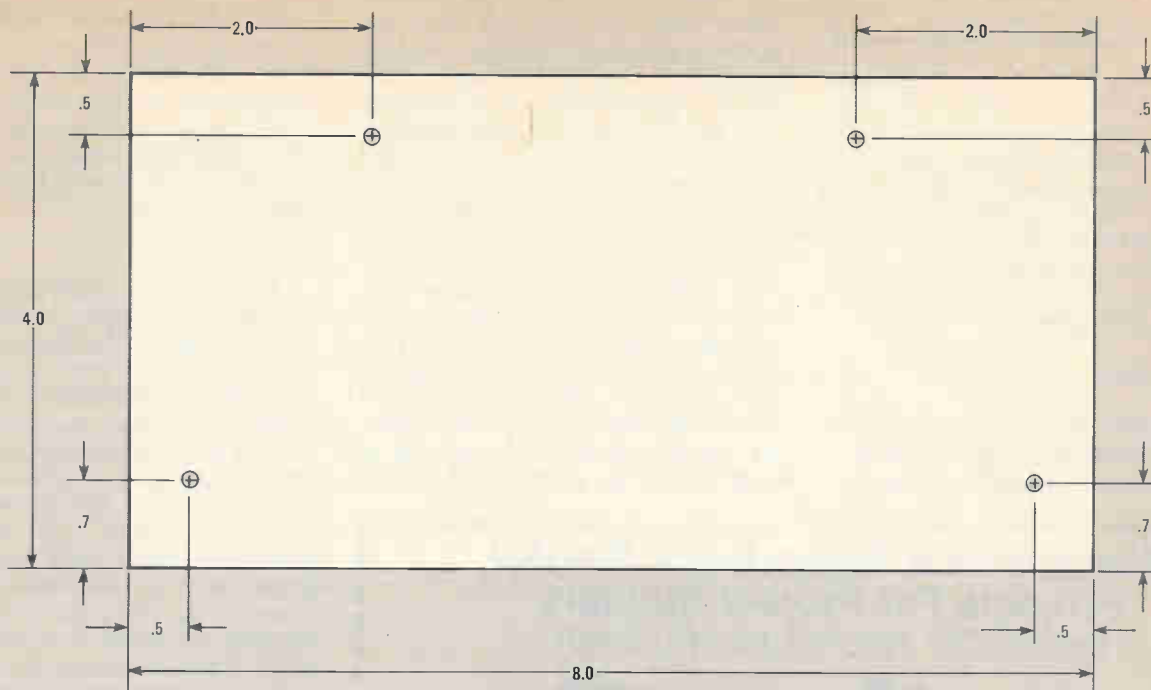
TOP PANEL detailed diagram is the copper on the unique Kerber Klock III. Dimensions in inches. Use #30 drill to make holes.
